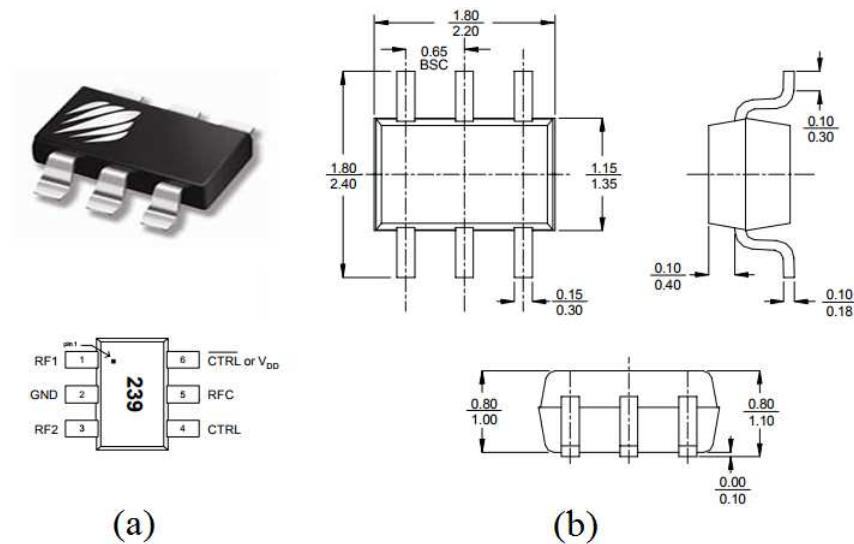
(a) Photo and pin configuration of chosen PE 4239. (b) dimensions in (mm) of the chosen PE 4239.
